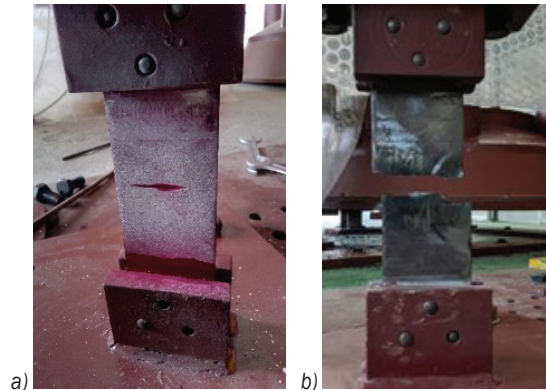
Butt-welded joint; a) initial notch, and b) fractured specimen
